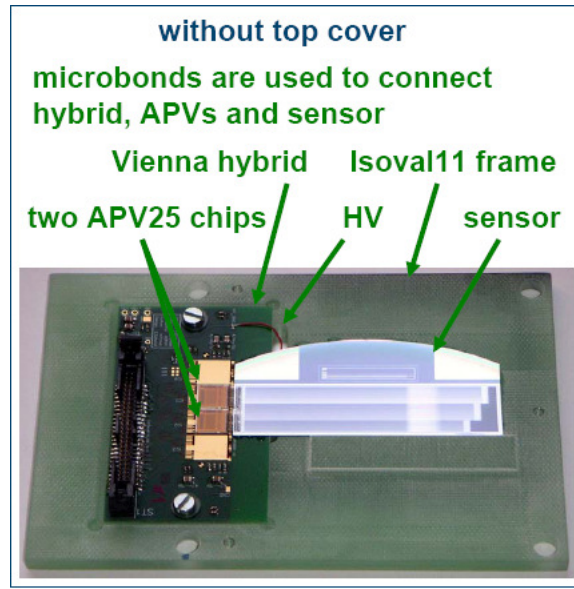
(cont'd) Detailed view of one HPK test structure and the FE hybrid board equipped with APV25 chips.
